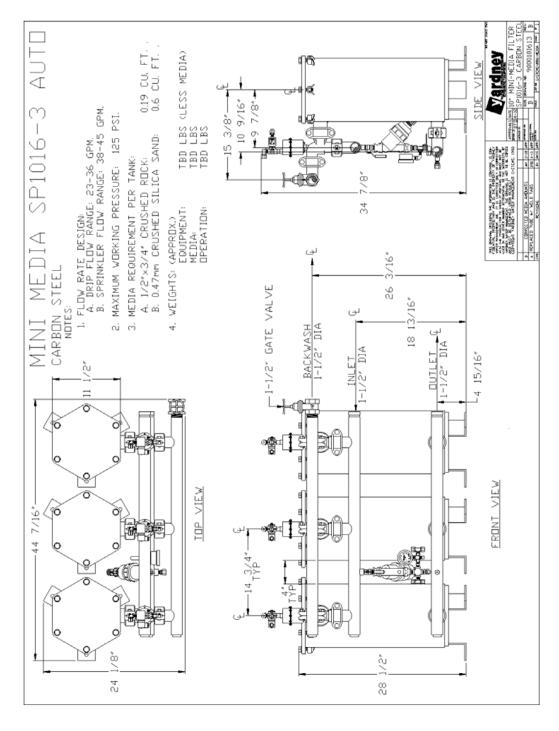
MINI MEDIA THREE TANK ASSEMBLY.
